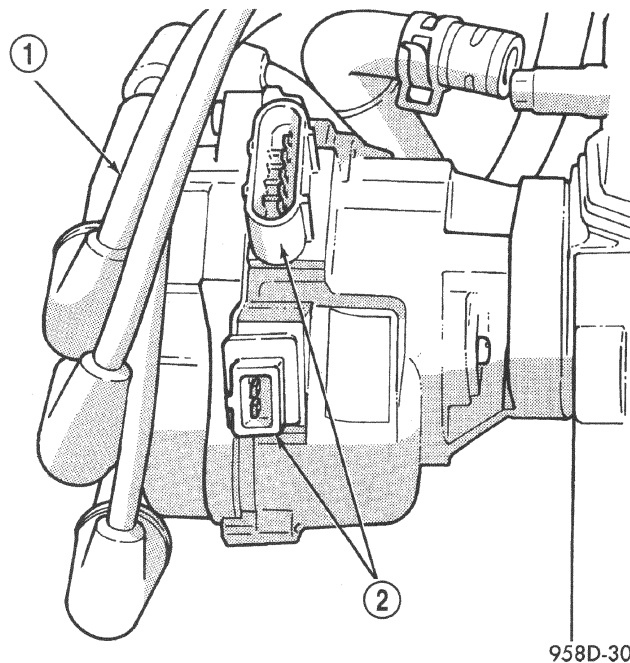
Distributor Electrical Connectors—Viewed From Rear of Distributor
